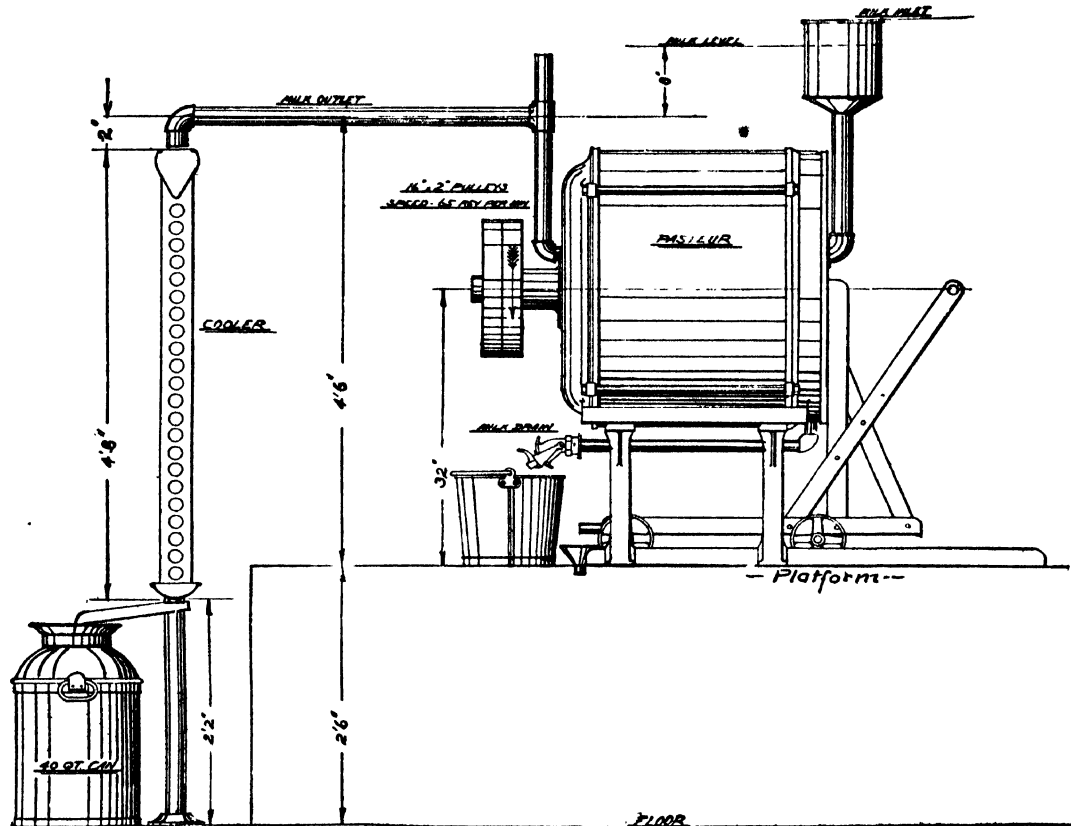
A regenerative pasteurizer, showing principal dimensions for installing.
